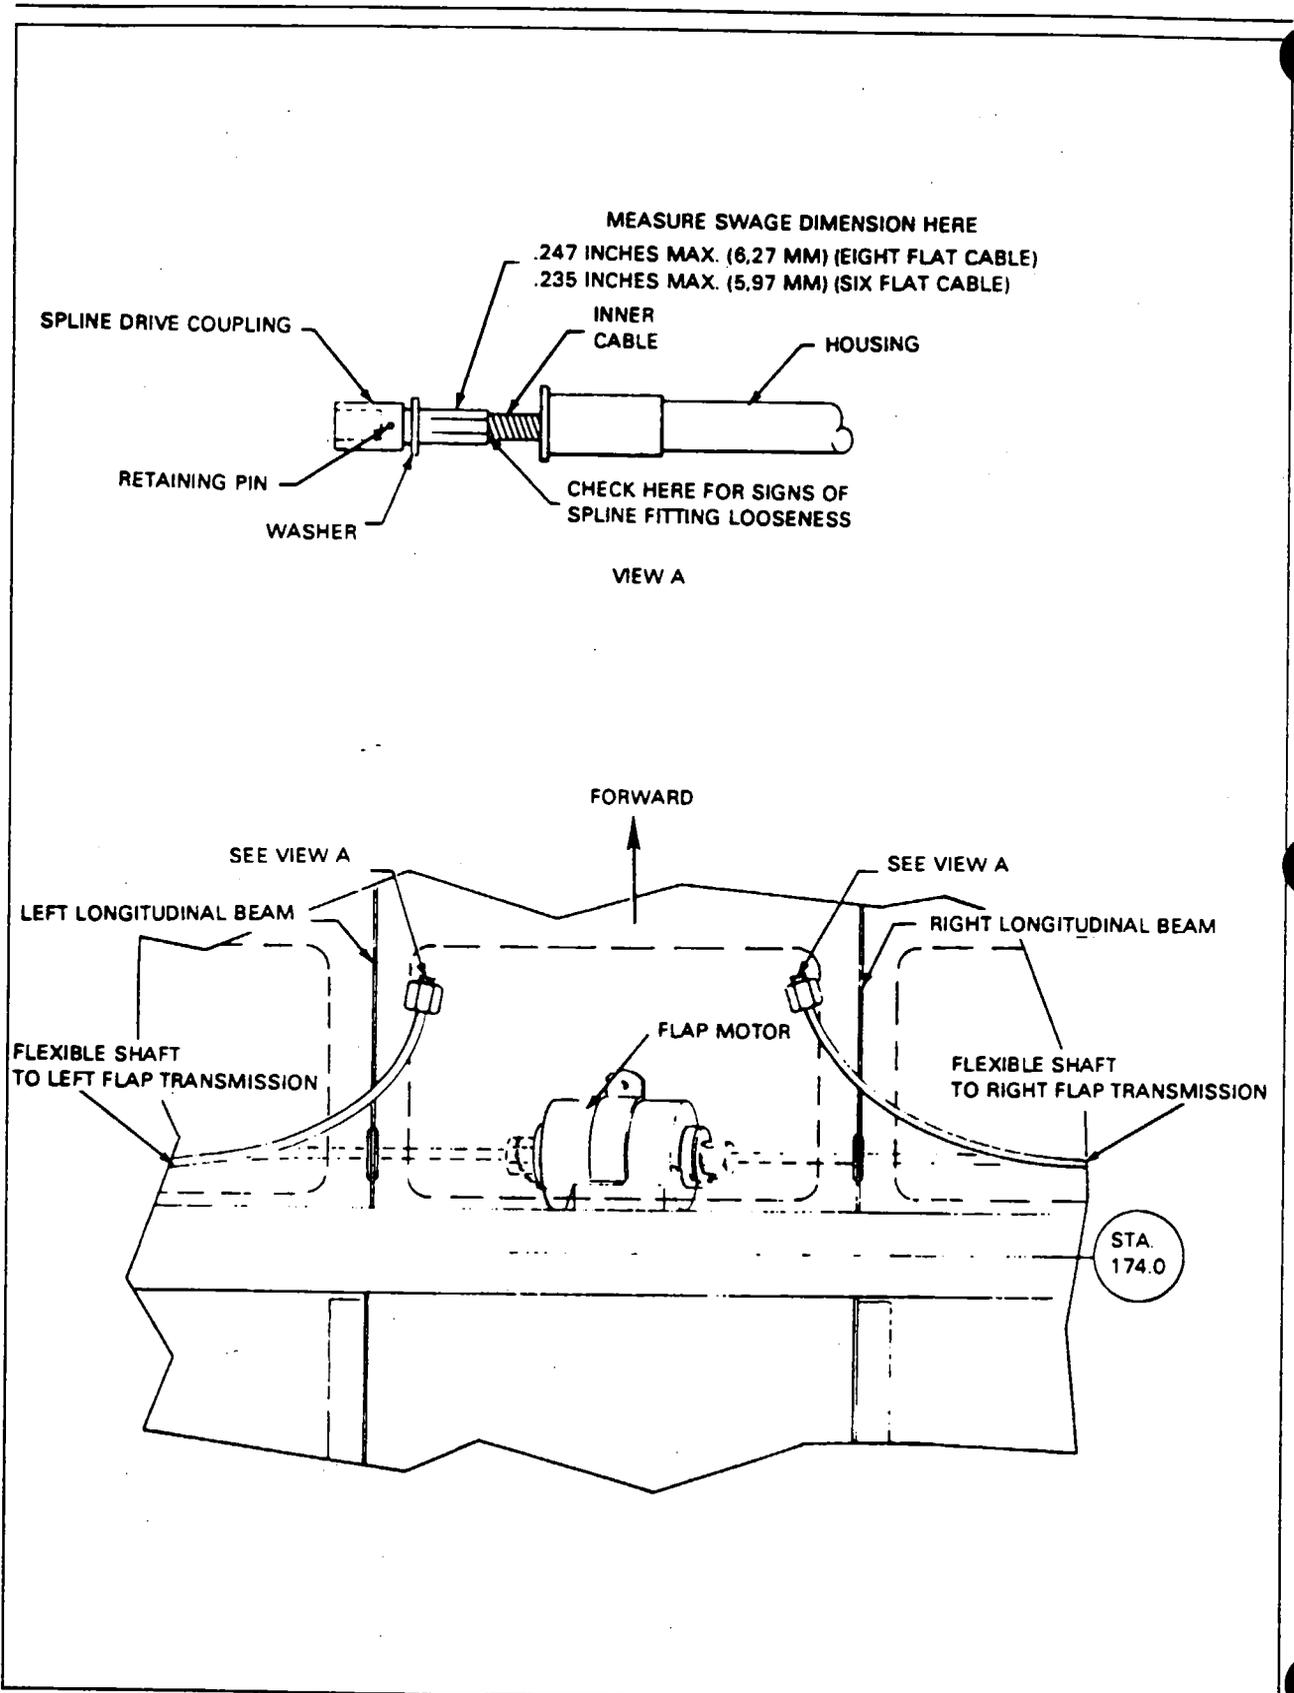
Wing Flap Actuator Cable - 500 Hour Inspection
